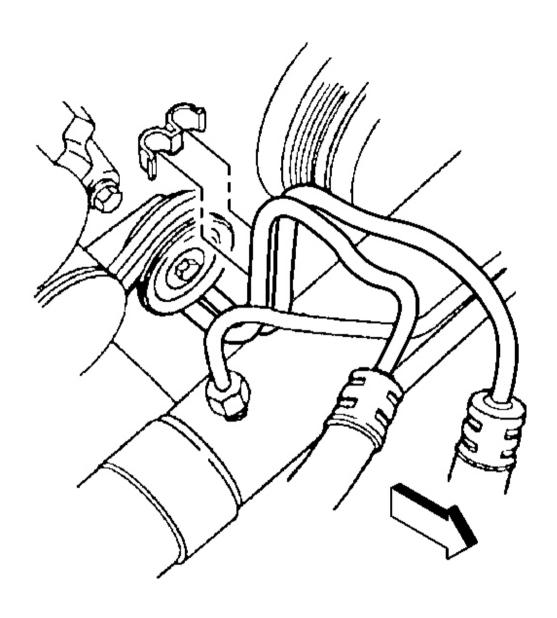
TOC Front Pipe & Front Clip Courtesy of GENERAL MOTORS CORP.
